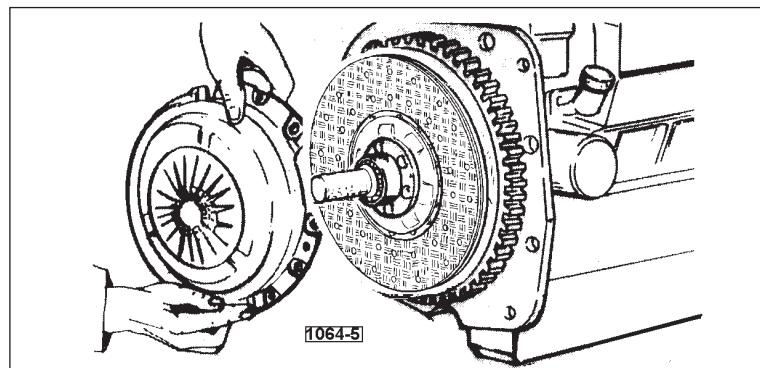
Installing clutch assembly through no. 5.9030.256.4/10 equipment.
